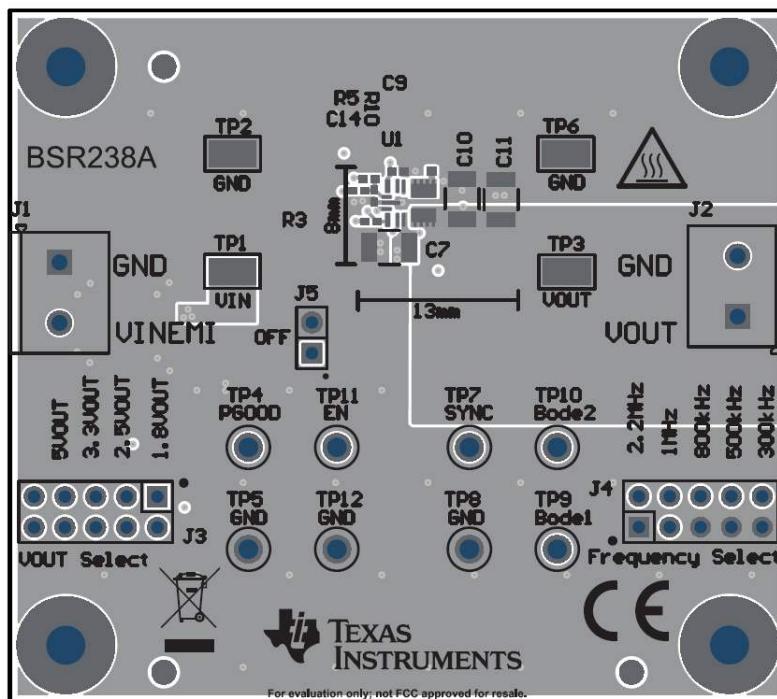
PCB Top 2-D (TLVM23625EVM)
